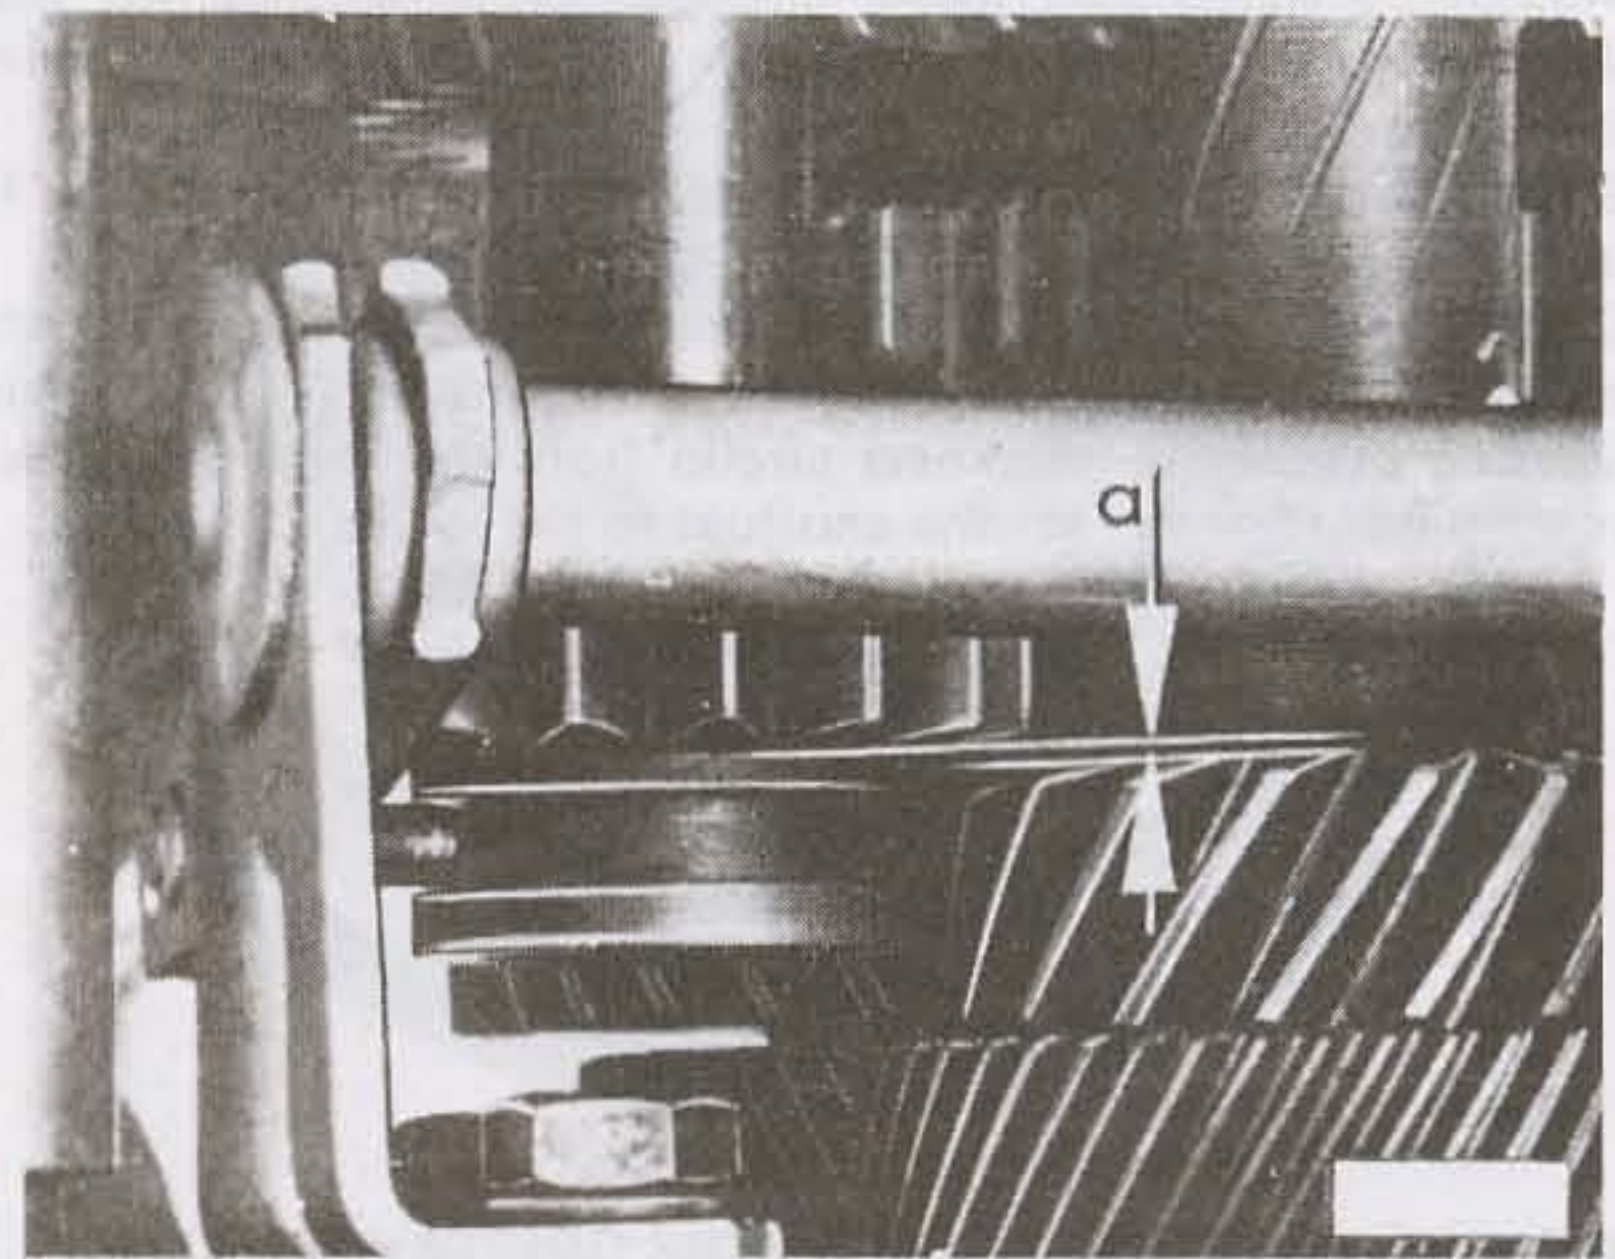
REVERSE SLIDING GEAR CLEARANCE (a) TO MAINSHAFT
